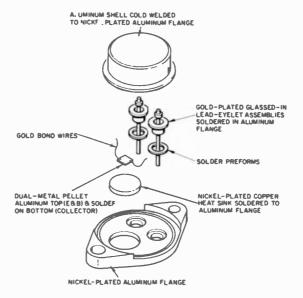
Construction of an aluminum package with soldered eyelcts.
